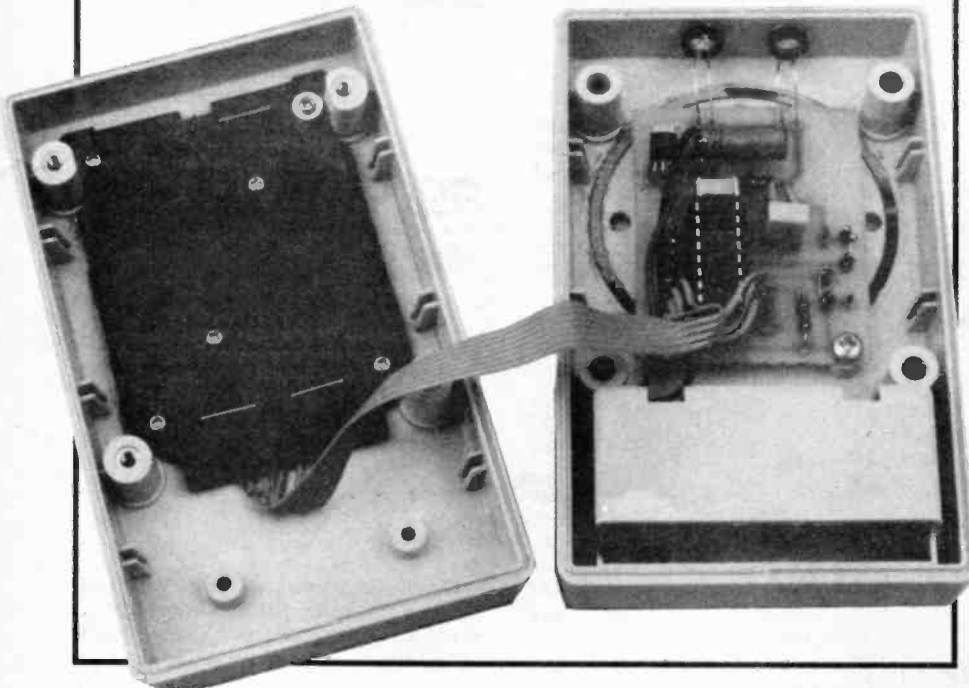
Printed circuit board component layout, lead-off wiring and full size underside copper foil master pattern for the hand-held transmitter. The completed transmitter, the position of the p.c.b. and the ribbon cable from the board the the keypad can be seen in the photograph below.
